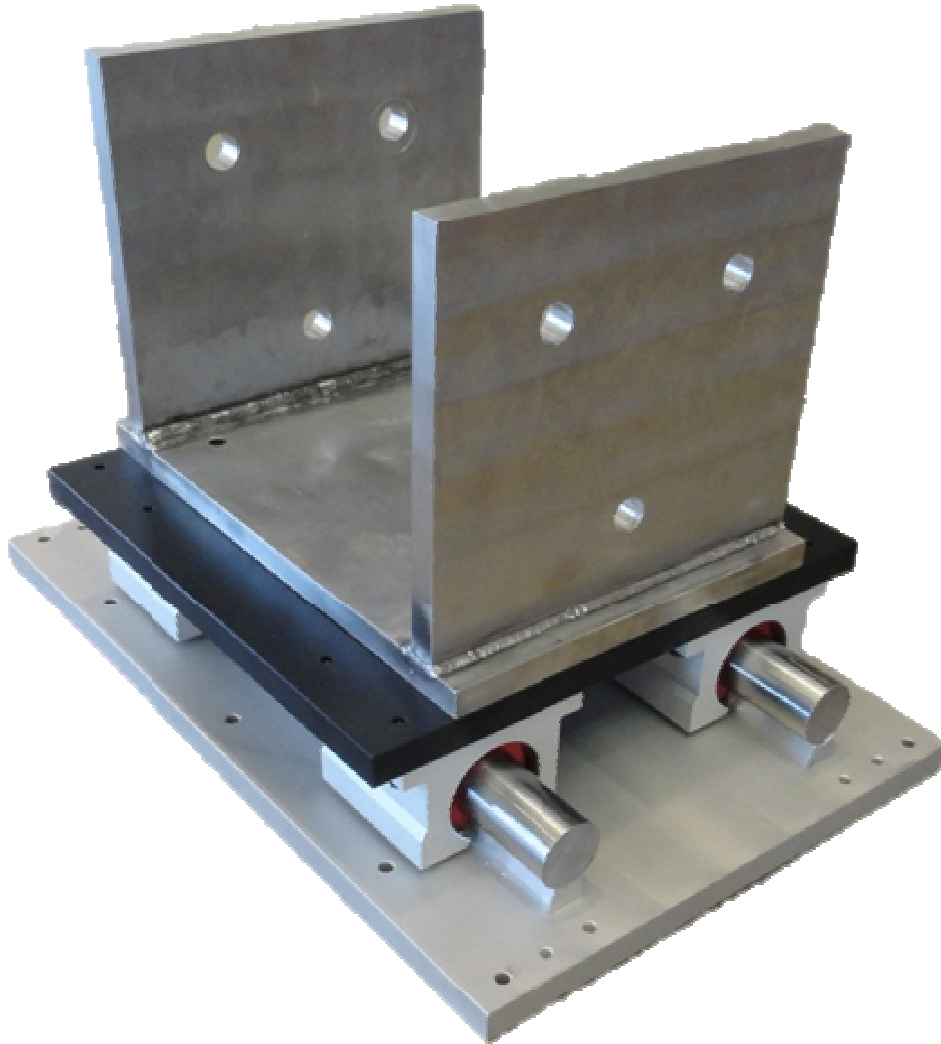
The base plate assembly is placed on top of the rail and slider system.
